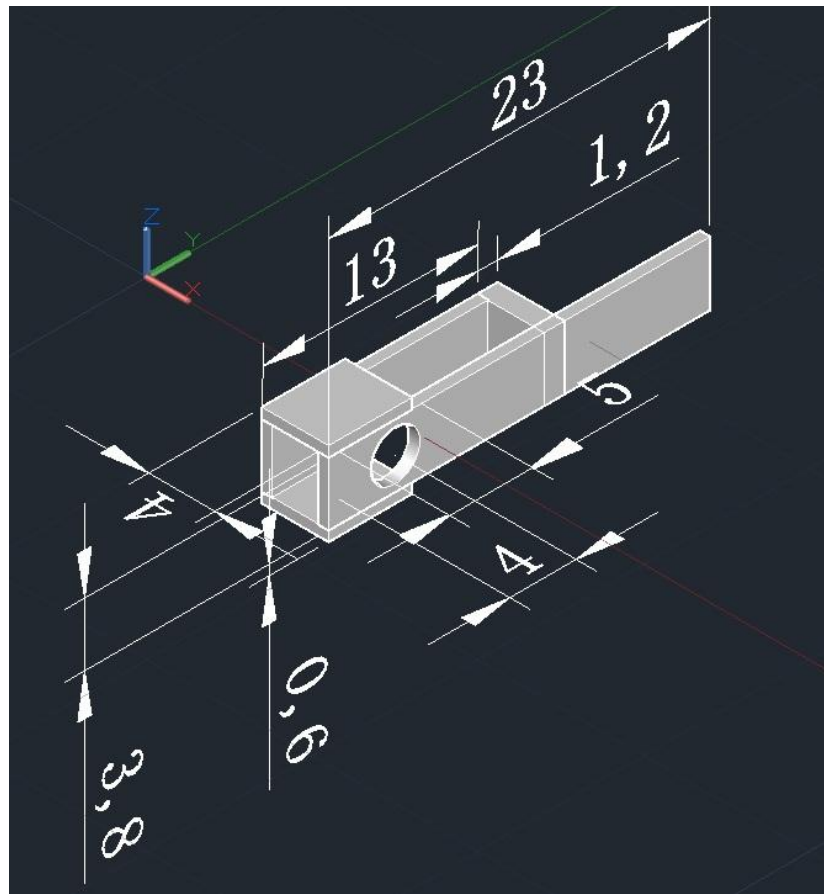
Dimensions of the antenna holder. The plate is made of plexiglass.
